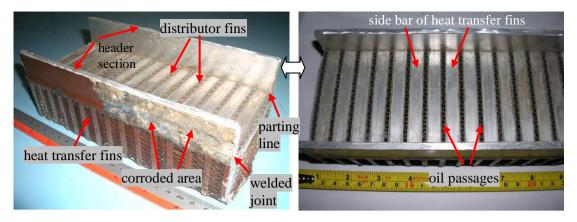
Close up view of the inside header port, showing a number of oil passages containing distributor fins and parting line of the weld joint between header and side bars/parting sheets.
